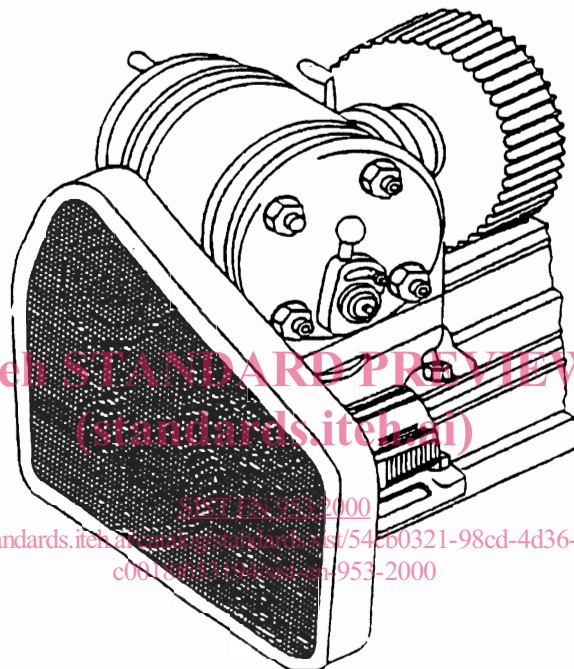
Example of an enclosing guard totally preventing access to transmission machinery
